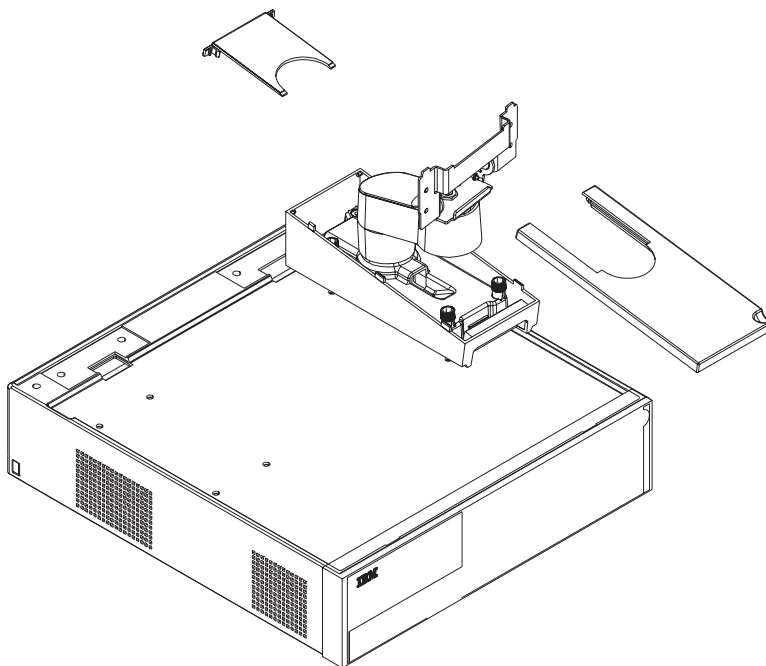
Securing the arm assembly to the SurePOS 720, 740, 780
